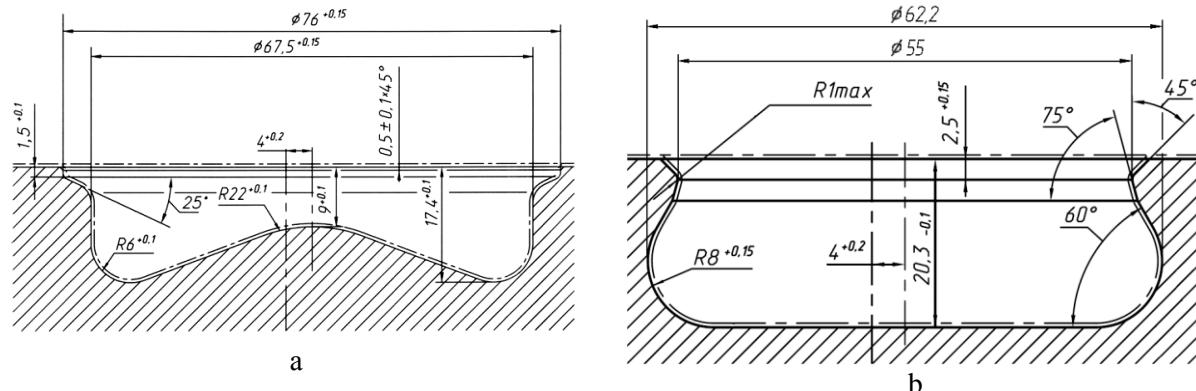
Combustion chambers: a – open combustion chamber; b – semi-open combustion chamber
